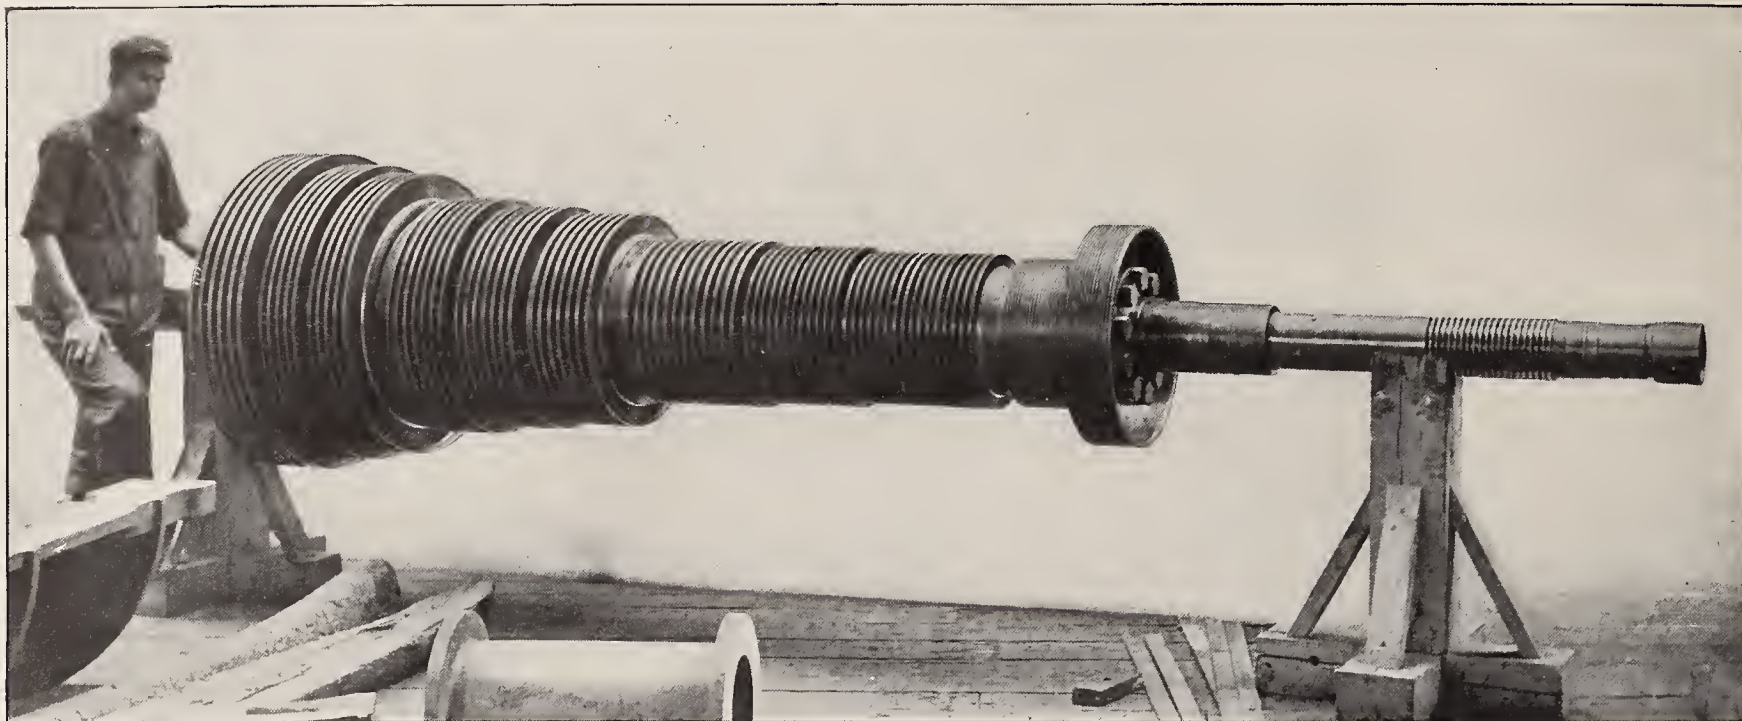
THE STEAM TURBINE SPINDLE WITH BLADING ASSEMBLED
